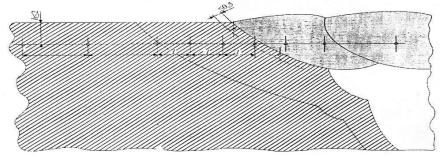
Arrangement of hardness measurement points in the heat affected zone and in the weld for butt joints: l = 0.7 mm for HV5; l = 1.0 mm for HV10
